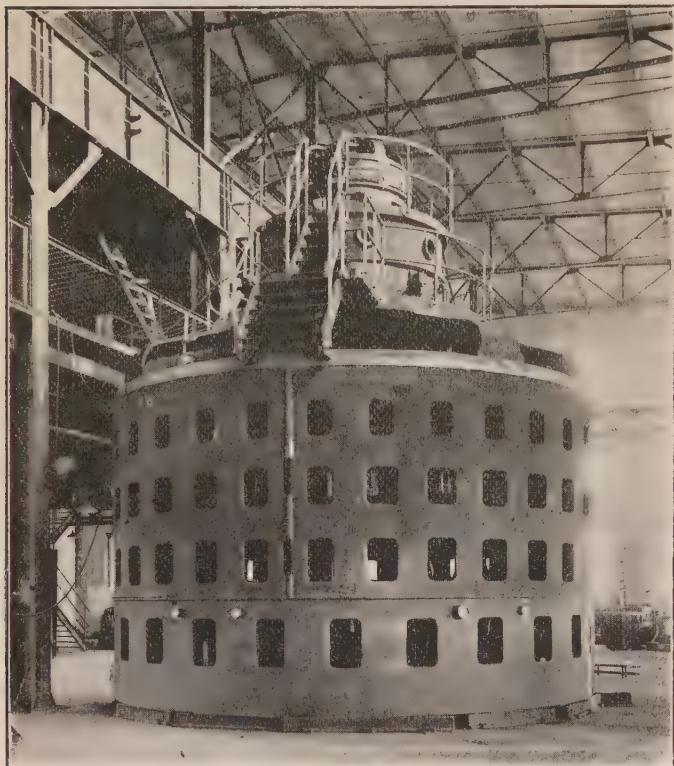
GENERAL VIEW OF THE ASSEMBLED UNIT
